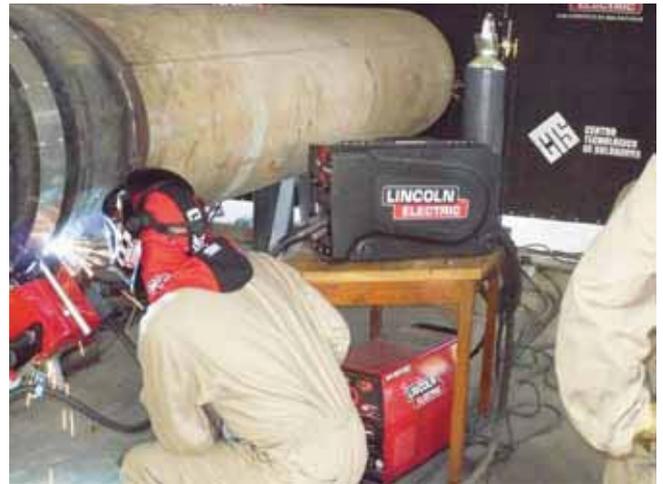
The welding team combined an orbital pipe welder, the Dyna Torque LONESTAR Automated Welding System, with Lincoln Electric’s innovative Pipeliner® 80Ni1, a gas metal arc welding (GMAW) wire developed specifically for the global pipe welding industry.
